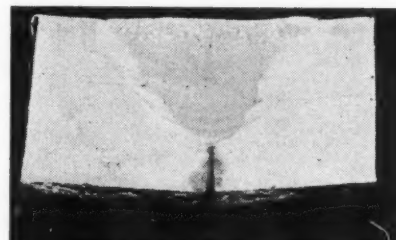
Weld made from both sides with incomplete fusion at the root of the weld
